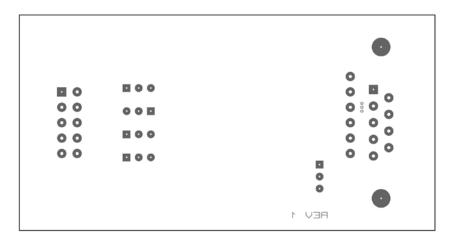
Low EMI Demo Board Layout (DC1746A), Bottom Layer
